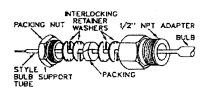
Part Number FTG13A-600R packing nut assembly. (Use with Style 1 bulb with support tube for direct immersion application.)
